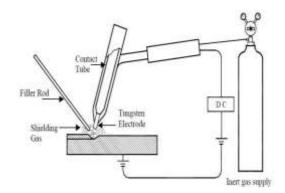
Manual Gas Tungsten Arc Welding
